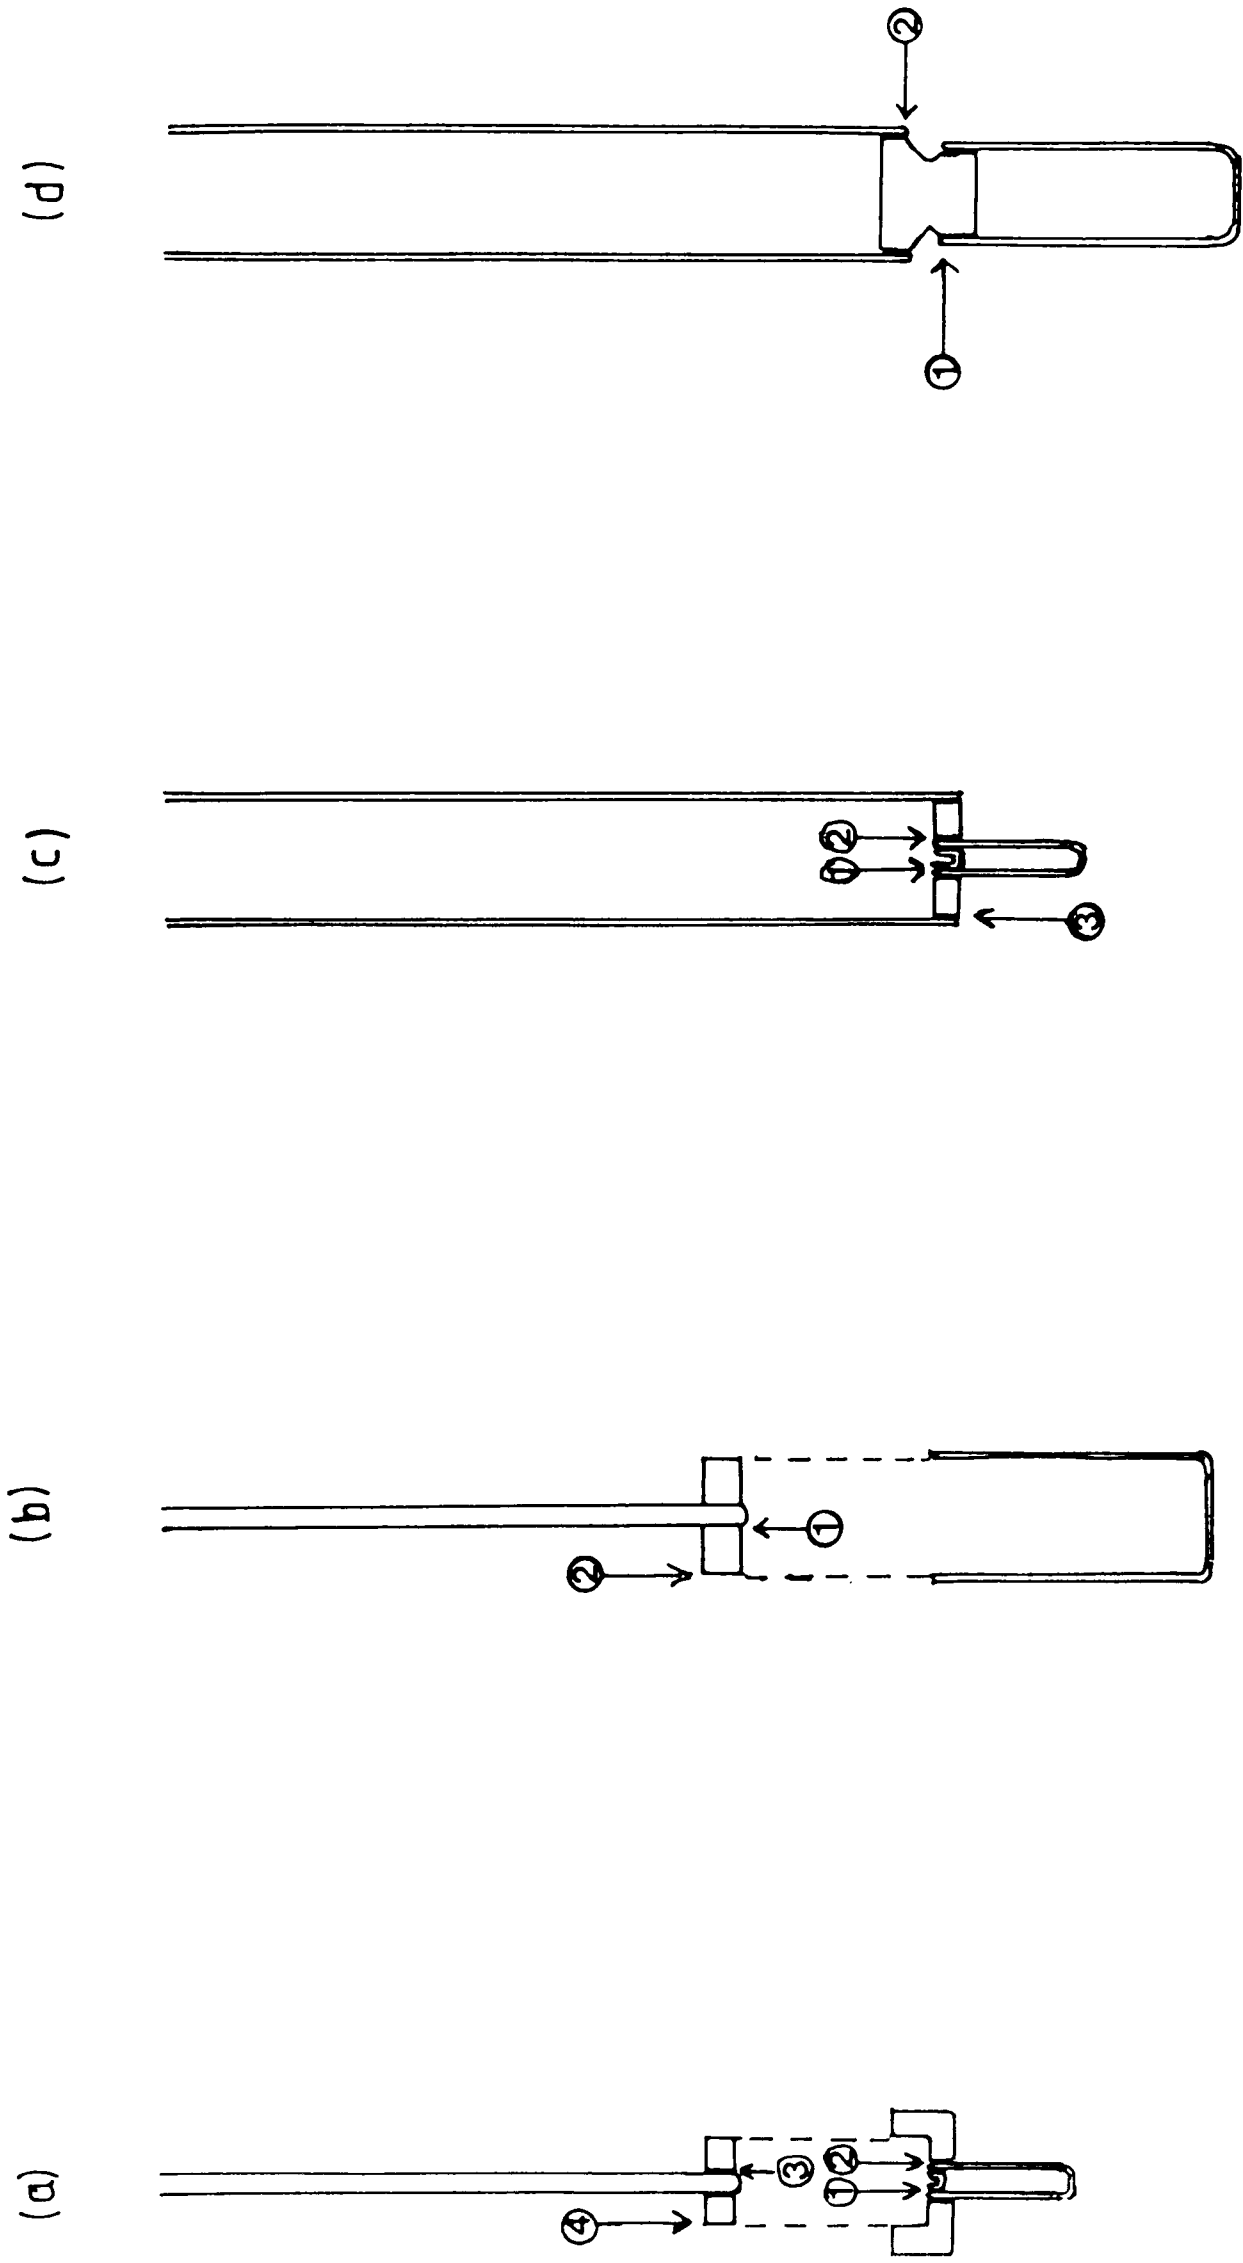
A schematic diagram of the welding procedures developed for sealing and mounting sample tubes onto tungsten rods (for use with thermocouples - (a) and (b)) and onto sighting tubes (for use with a pyrometer - (c) and (d)).
